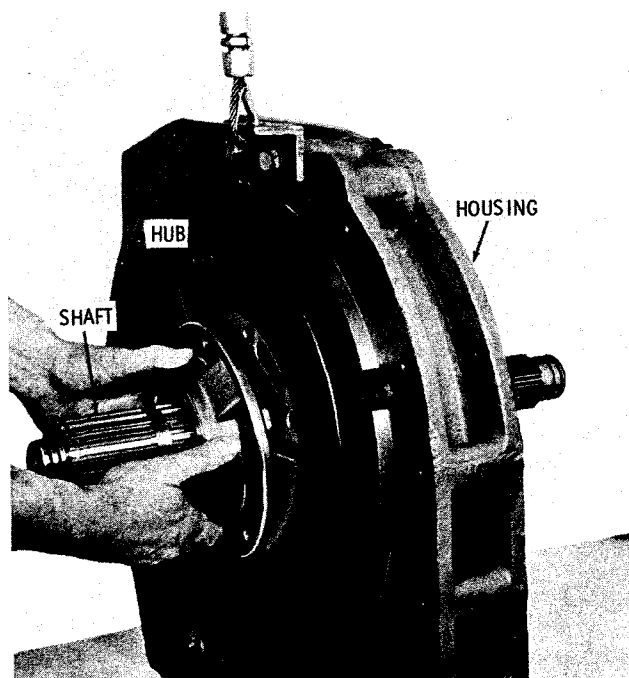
Installing oil transfer hub (CBT, CLBT, prior to S/N 35993) S1689
